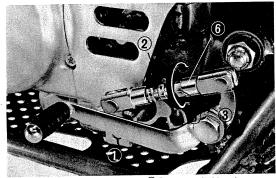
① Gear change pedal ② Lock nut (lefthand thread) ③ Adjuster ④ Raise ⑤ Lower ⑥ Lock nut
